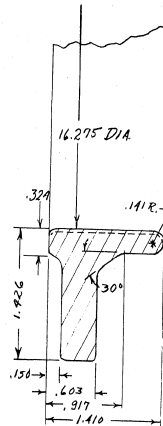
P/N 226962 - Front Flange, Rear Main Bearing Support Cone Assy, Material Ti-A70.
